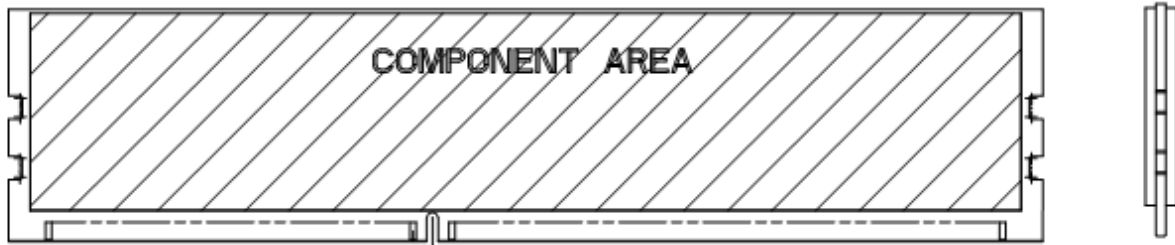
Module Profile, refer to JEDEC MO-269 for details
